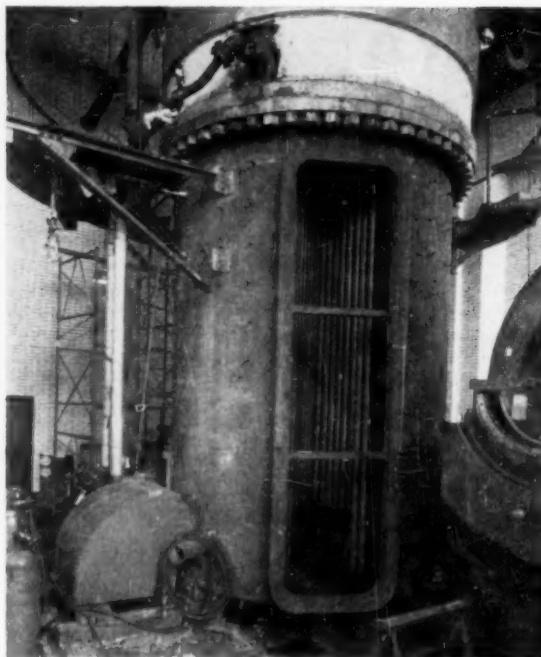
MERCURY-CONDENSER BOILER SHOWING PORTION OF PORCUPINE-TYPE TUBE BUNDLE AND OPENING FOR ATTACHING TO MERCURY TURBINE-EXHAUST SHELL
